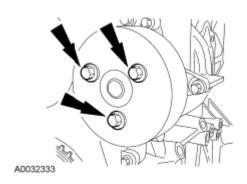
Locating Coolant Pump Pulley Bolts Courtesy of FORD MOTOR CO.
